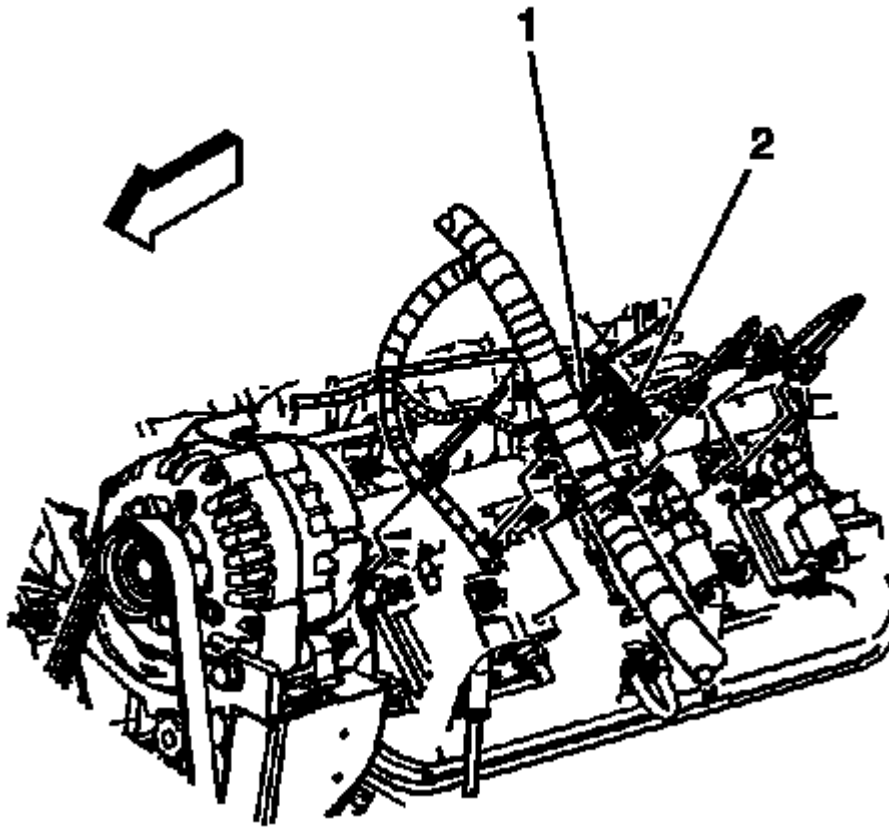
View Of Main Ignition Coil Wire Harness Connector & Clips
